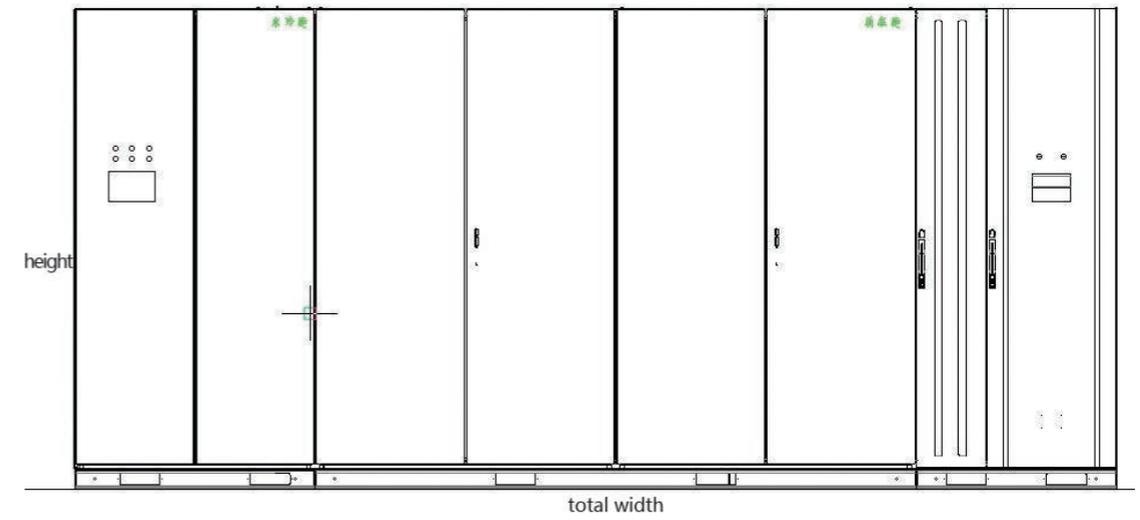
Dimensional Drawing of G31-10kV-Indoor-Water Cooling FGSVG-C1.0/10-W
